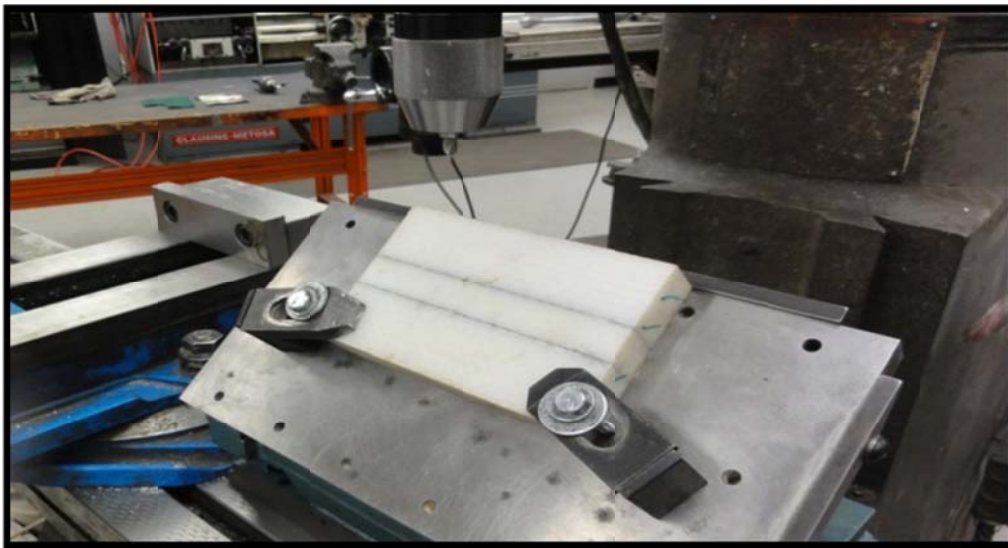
Six inch Long Specimens Placed on Bridgeport Mill to Machine V-Notch
